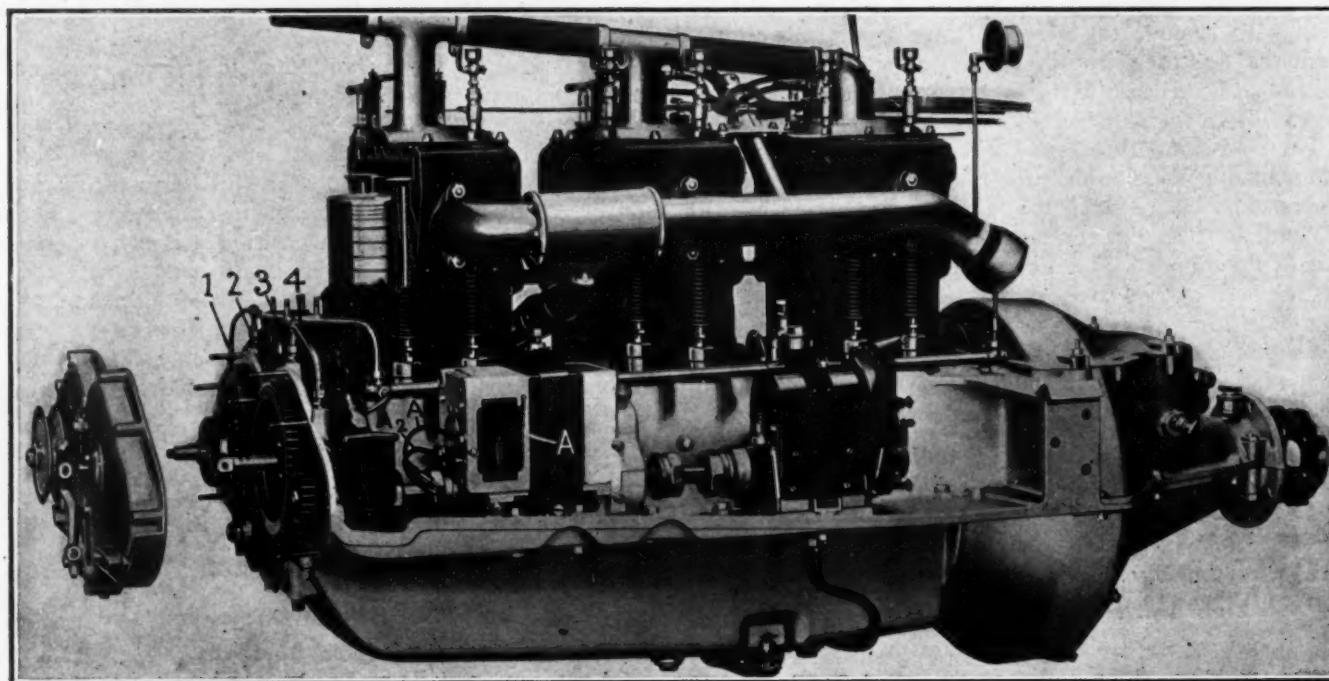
Exhaust side Packard six-cylinder motor for 1913 models, showing the electric lighting dynamo A with its two wires A1 and A2 leading from it. Also the four oil leads 1, 2, 3 and 4 to the camshaft bearings, the magneto shaft and the pump shaft
